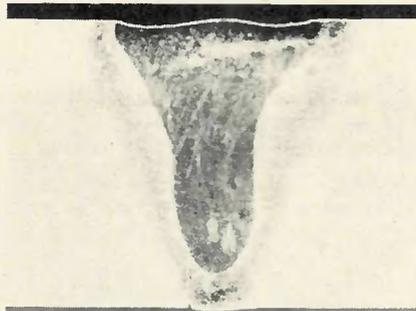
Transverse section illustrating the weld profile of a single-pass, partial-penetration weld made utilizing a defocused beam
